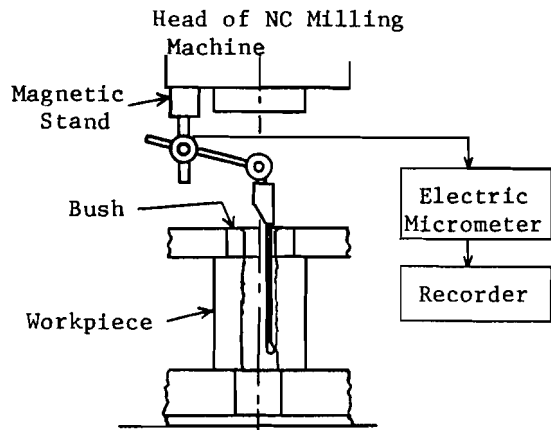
Schematic view of measurement of axial geometry of drilled hole
